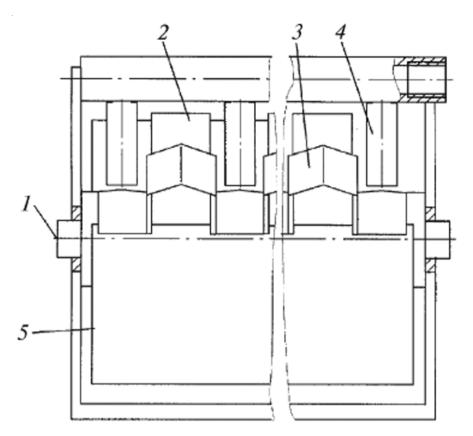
Diagram showing position of adaptor for cleaning of slime-containing cylindrical magnetic disks (side view): 1) shaft with flat; 2) hollow cylindrical magnetic disk; 3) adaptor for cleaning slime-collecting elements; 4) tubes; 5) base of container.
